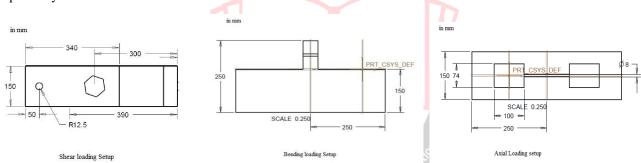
,3,4 bolted joint plate dimensions for Shear, axial and bending attachment
